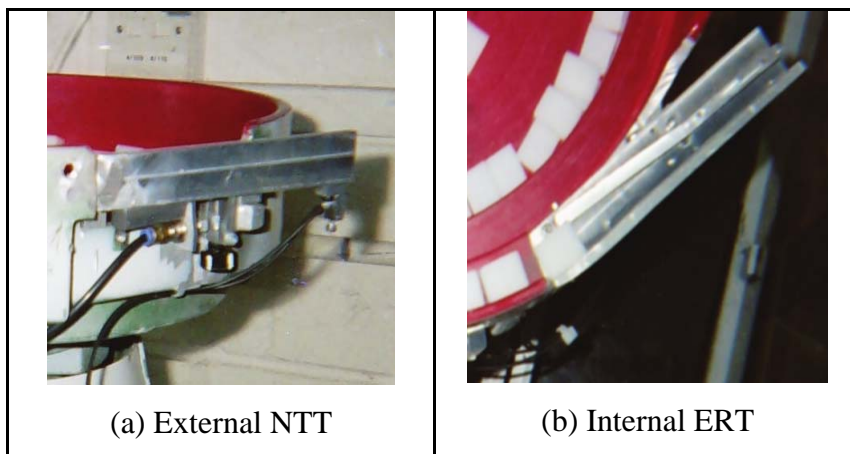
Photograph of the Automated Edge Riser Tool
